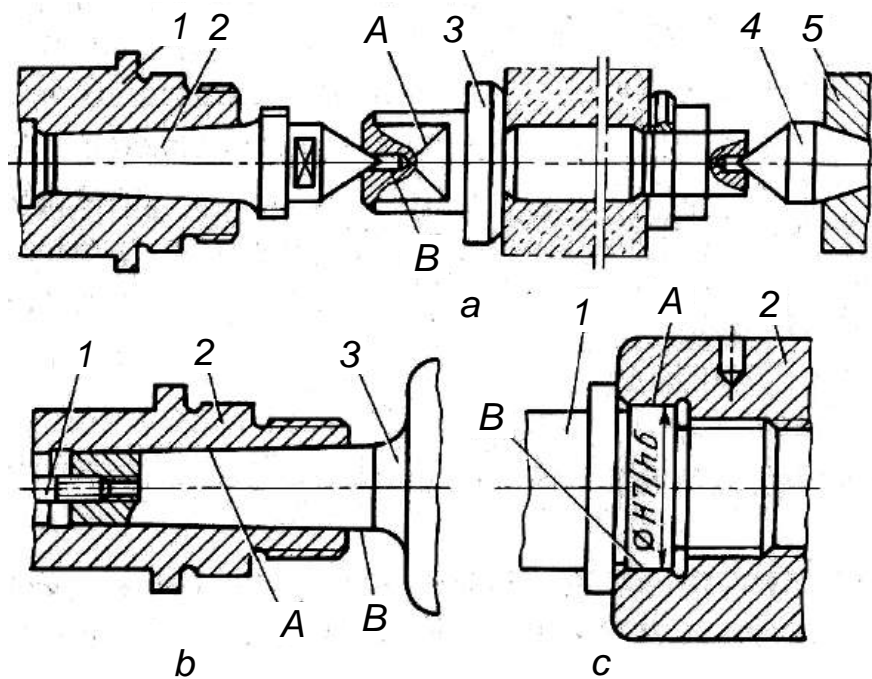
Methods of installation of workholding devices in turning machines:
